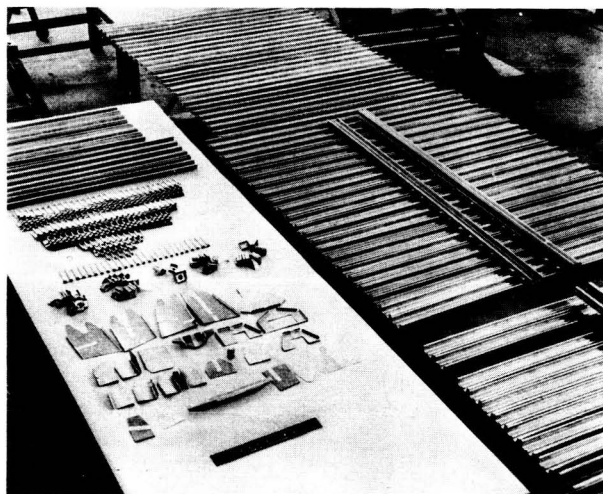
TEST SPECIMEN - DETAIL PARTS
